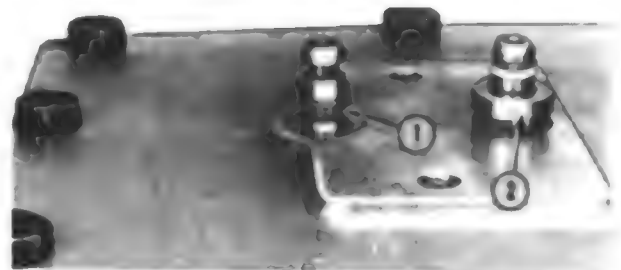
With the servo pressure check cover removed, use a tie-rod end tool and unscrew the servo regulator valve assembly.
